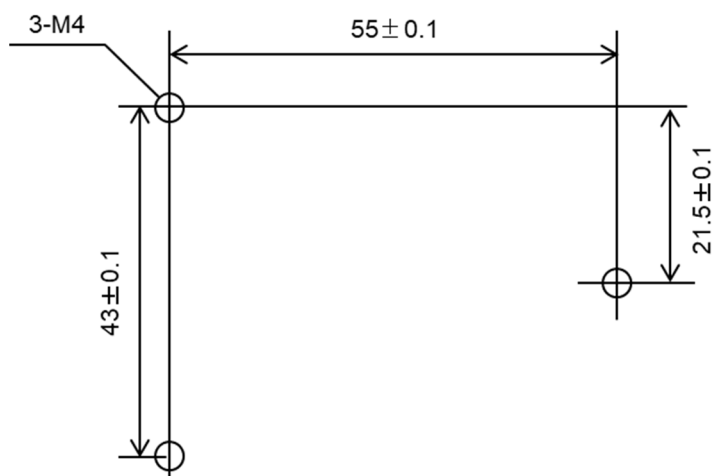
Recommended Mounting Dimensions (millimeters)
